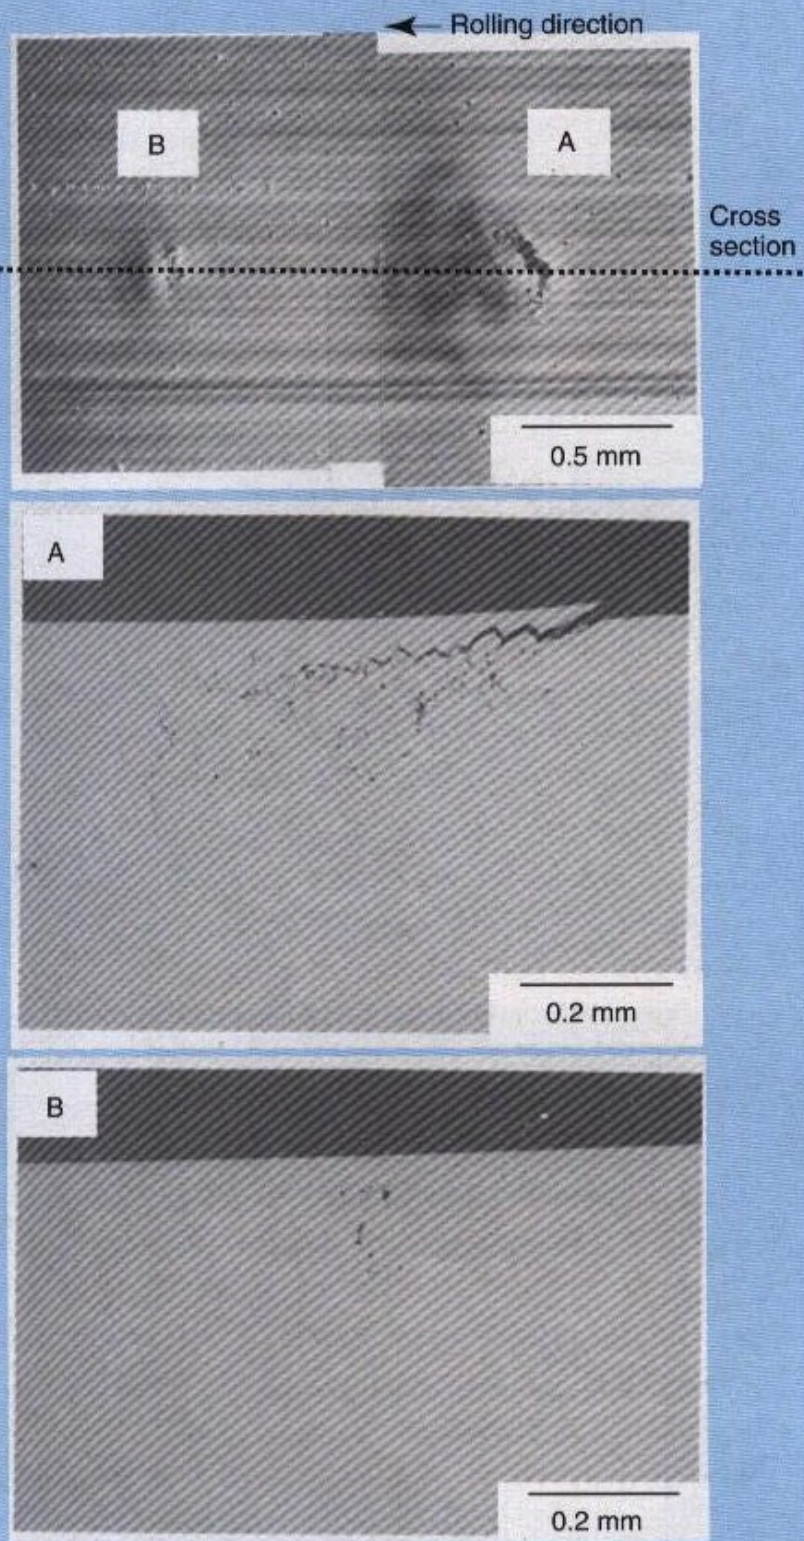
Early stage flaking of the outer ring raceway of a tapered roller bearing under water-infiltrated grease lubrication
